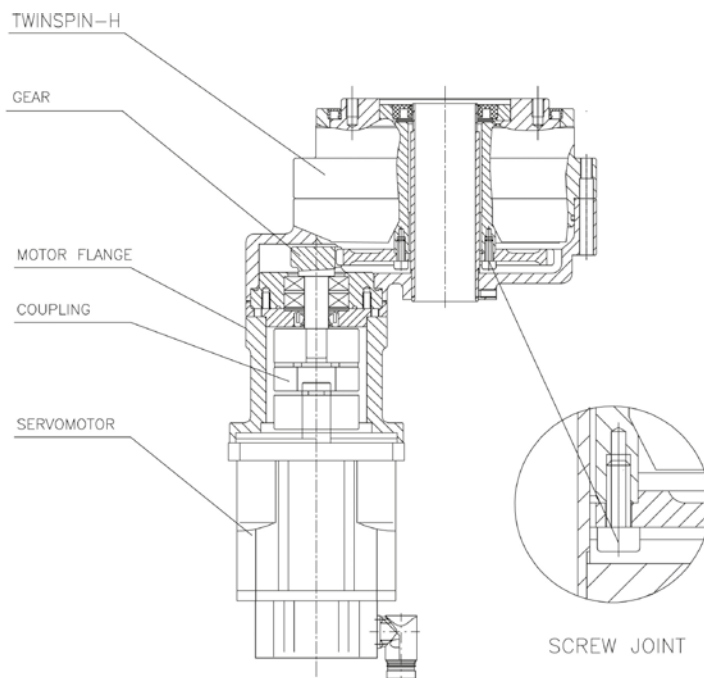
Connection of toothed gear with gear shaft via screws
